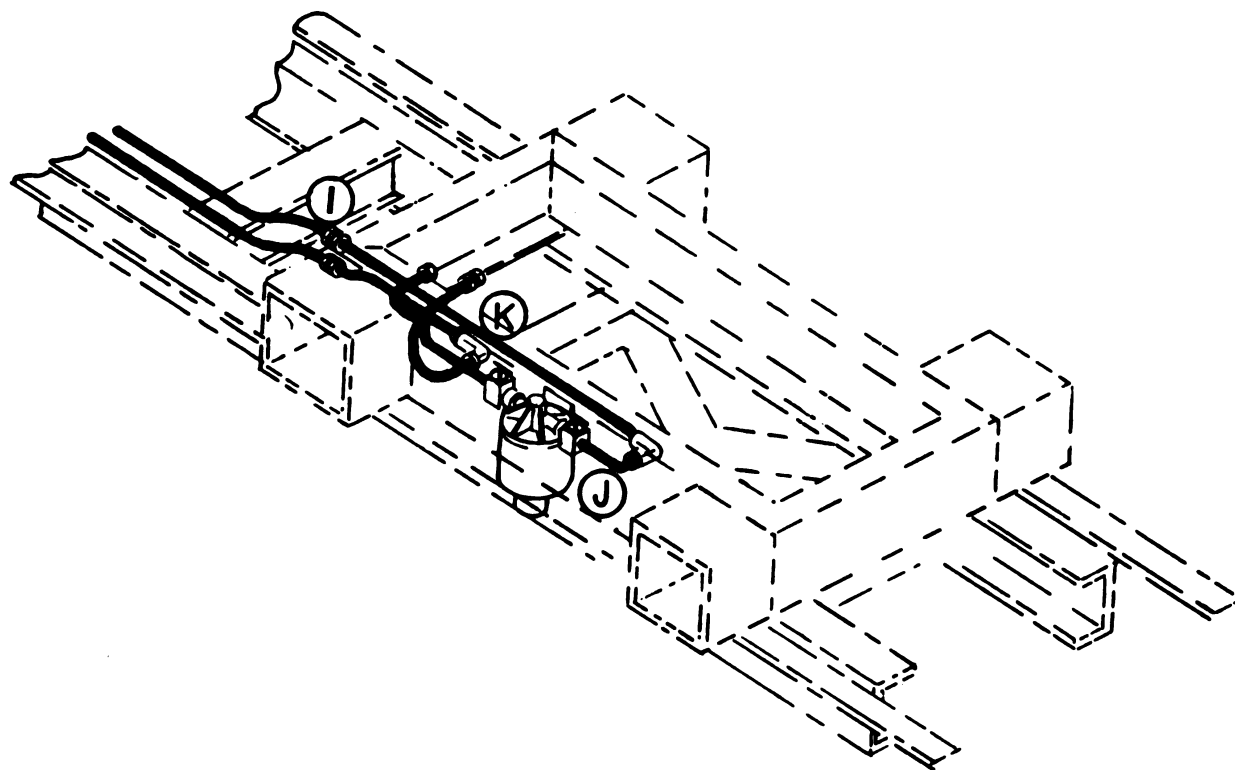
FUEL SYSTEM (SHEET 2 OF 11)
